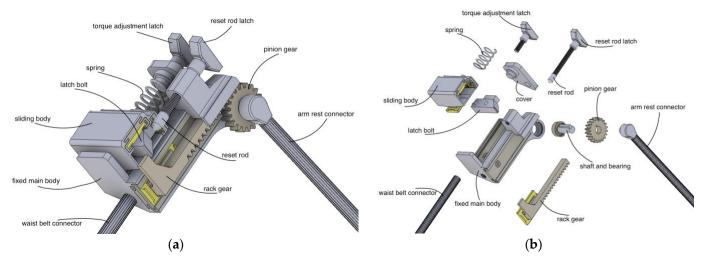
Mechanism inside torque generator: (a) assembled view; and (b) exploded view.
